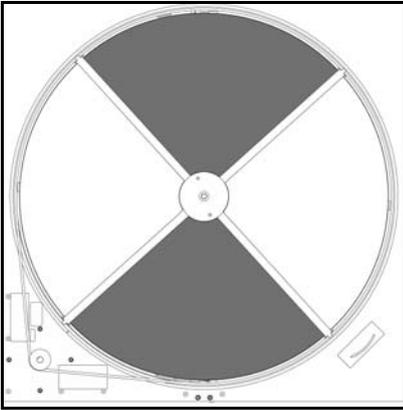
Remove or install opposing segments to minimize wheel imbalance.
